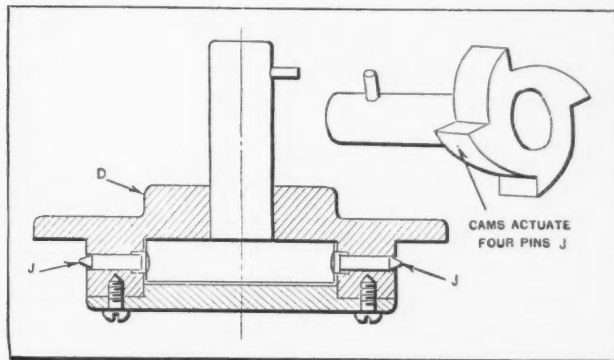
Cam-operated Chuck for Holding Piston Packing Method of Holding Thin Work
